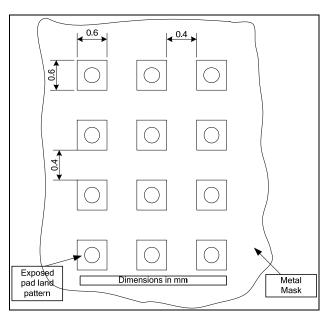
Recommended Solder Printing Paste Mask Apertures (PS)
